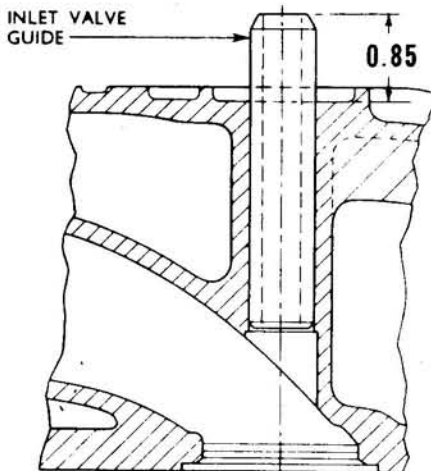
Press intake (inlet) valve guide into cylinder head so protrusion above machined spring seat is 0.85 inch as shown.
